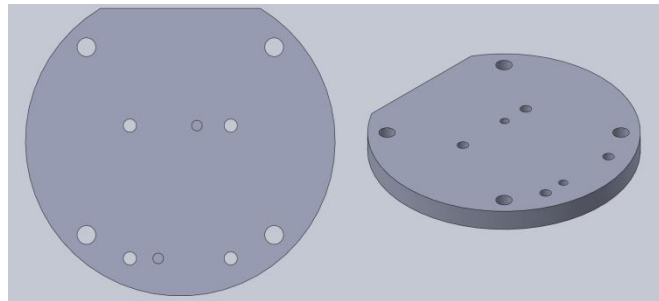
Head base plate design to seal the headform and to act as a mounting surface for the instrumentation bracket
